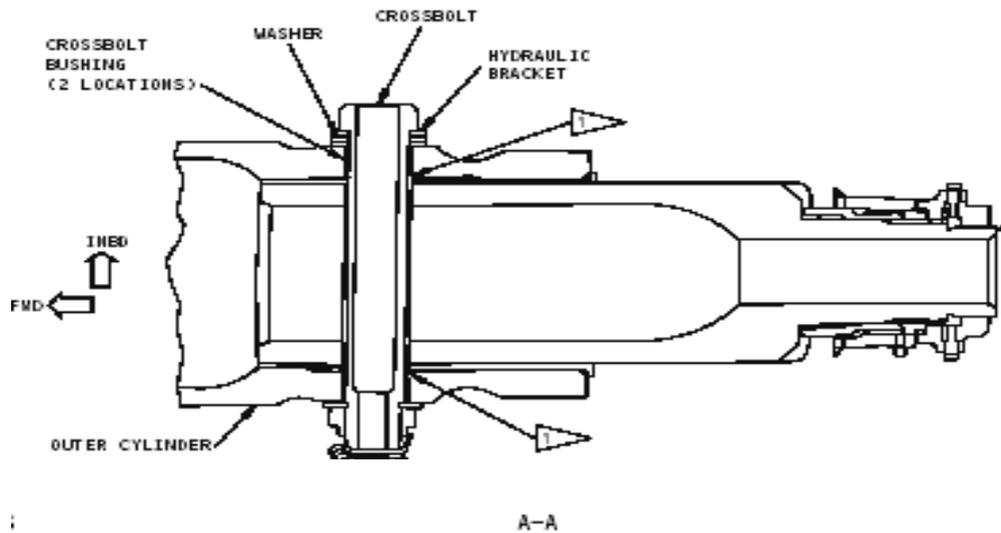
Cross-bolt holes and bushings in a Boeing 767 Landing gear structure
